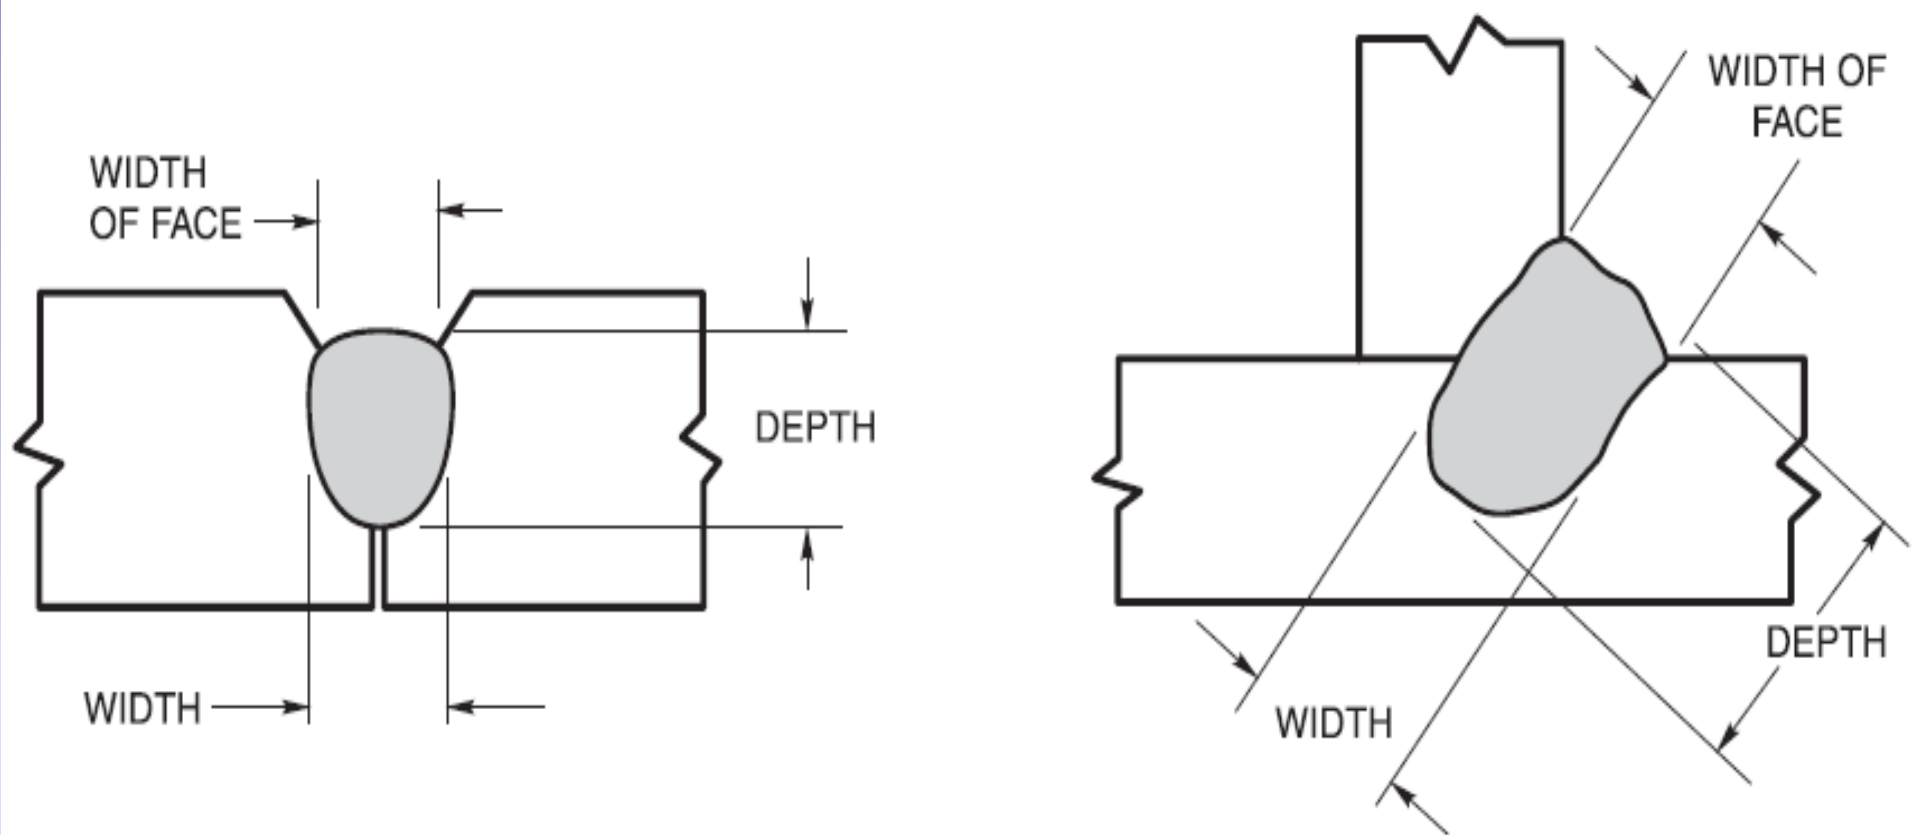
Weld Bead in which Depth and Width Exceed the Width of the Weld Face (see 3.7.2)
